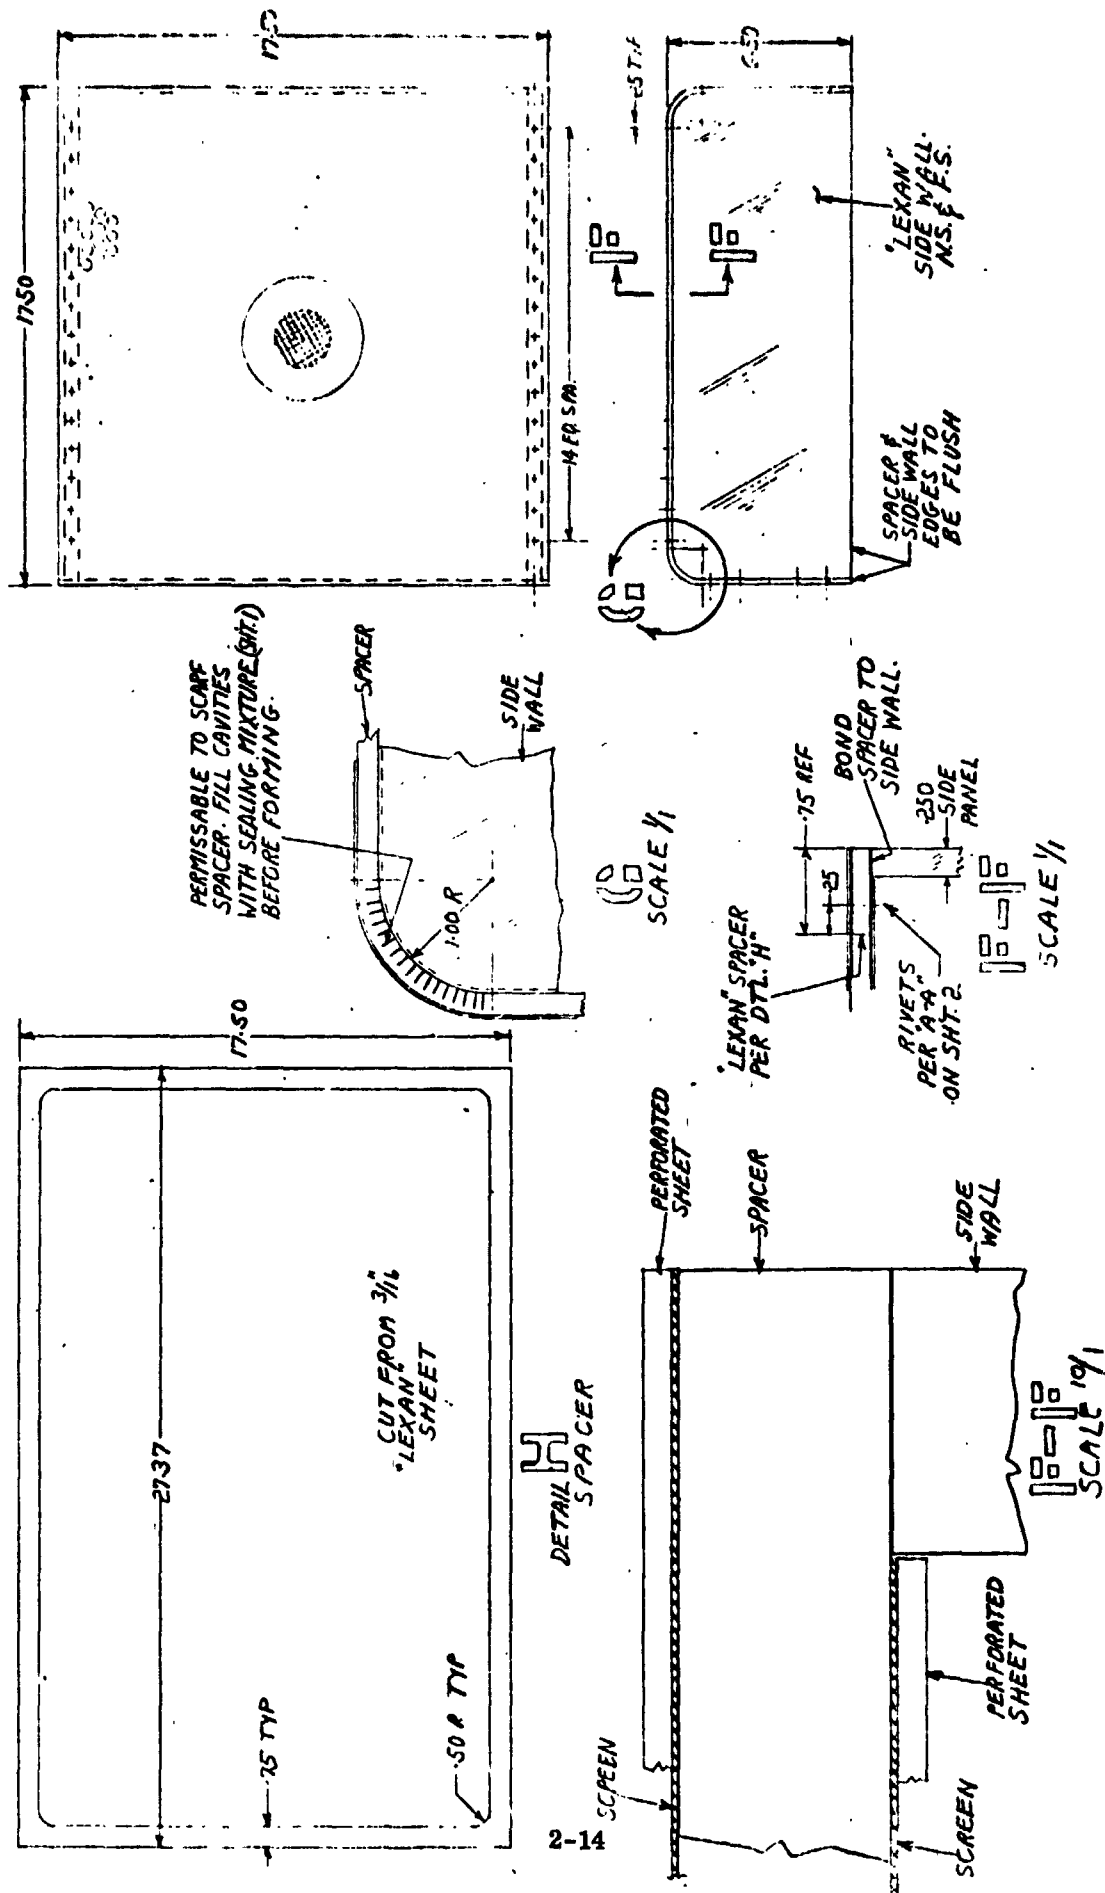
Inner Basket Assembly/Refilling Test Apparatus (Sheet 4 of 5)
